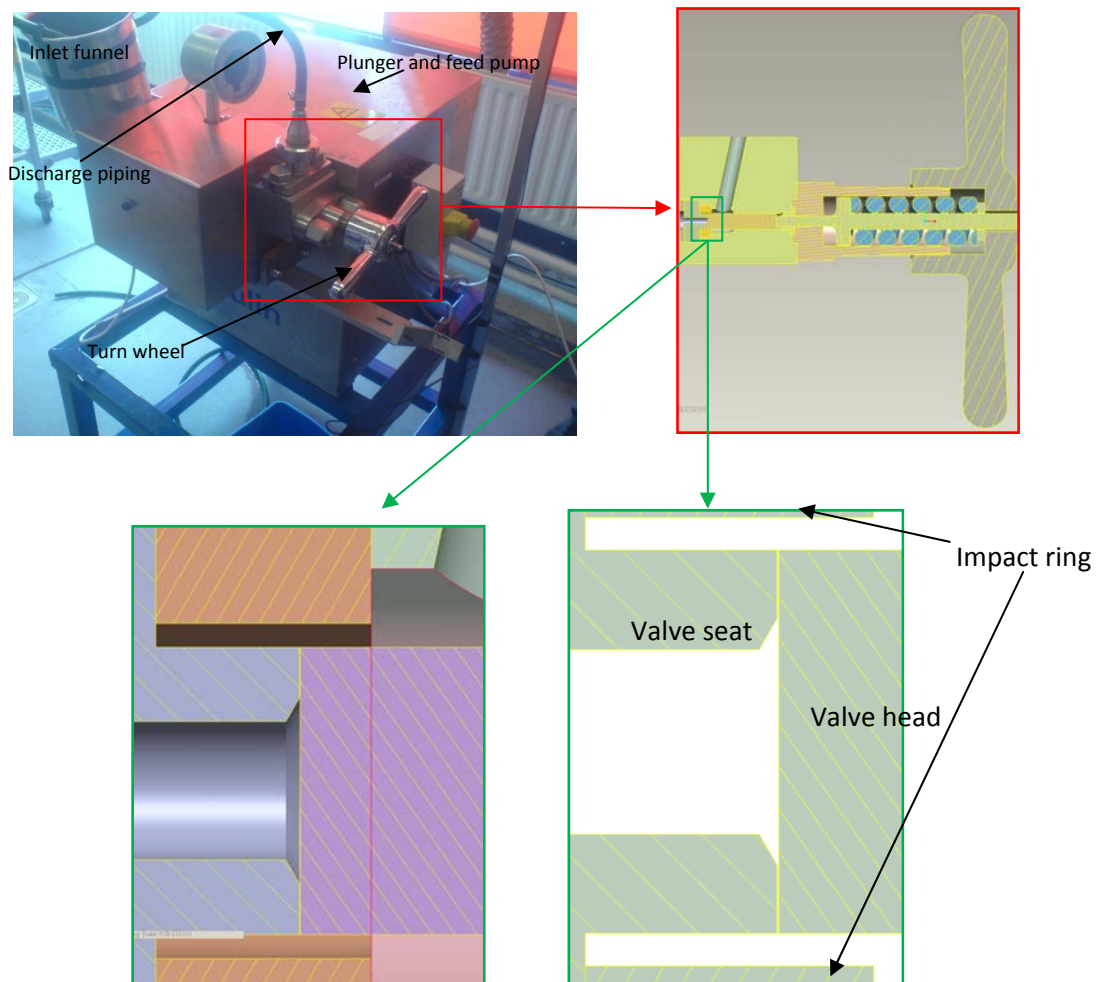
The homogeniser (a) full assembly, (b) X-section of valve and turnwheel, (c) axi-symmetric view of valve region and (d) 2-d view of valve region
